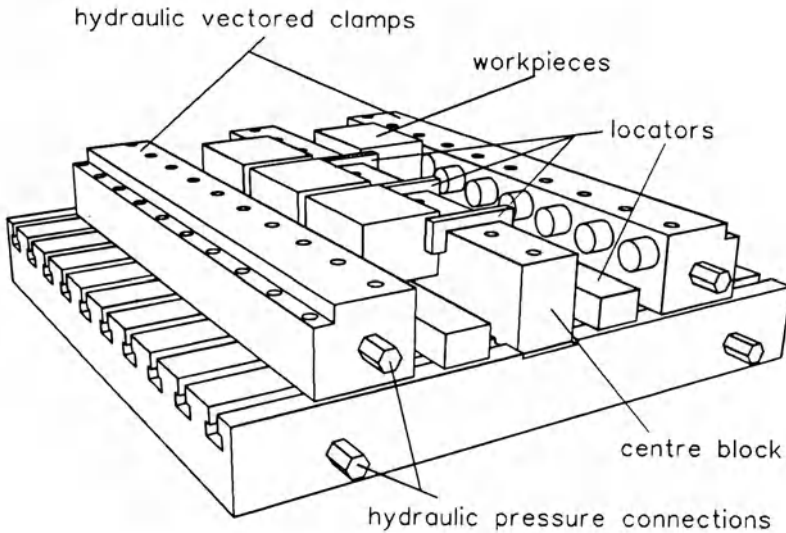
A flexible pallet system used to hold multiple workpieces
